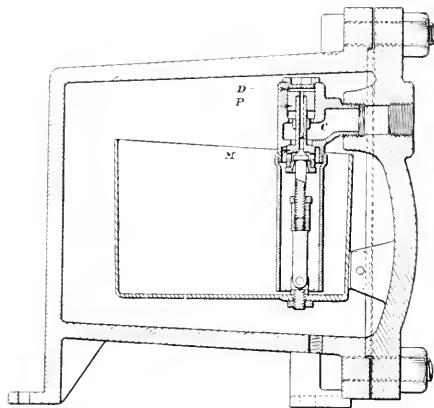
BUCKET-TYPE STEAM TRAP WITH DOUBLE VALVE SYSTEM
